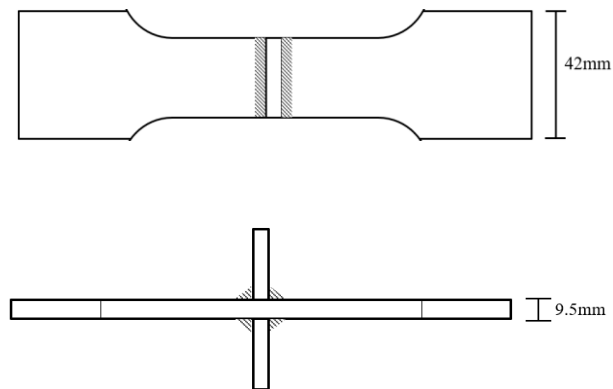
Transverse non-load-carrying attachments welded joints.
